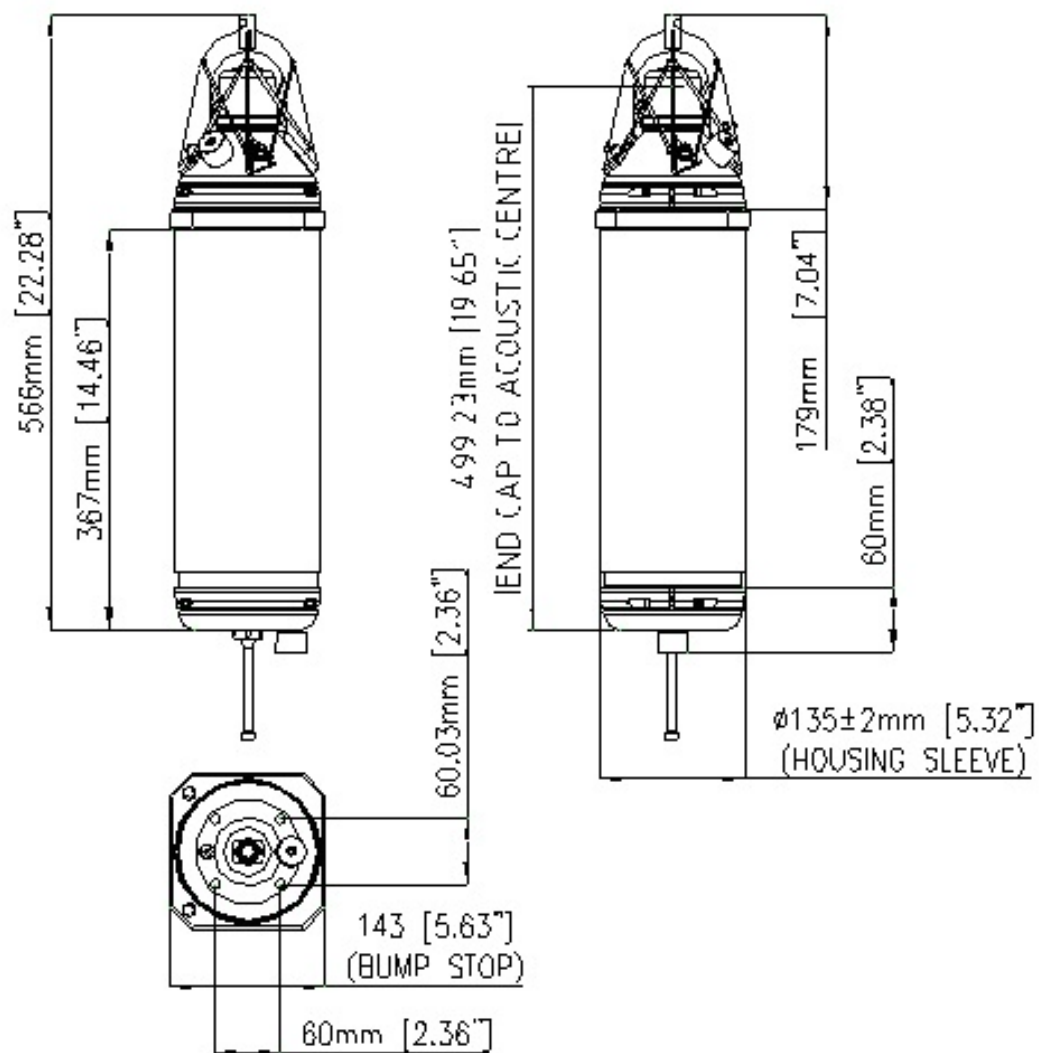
OUTLINE DRAWING: TYPE 8000-000-05 MINI UNIT
